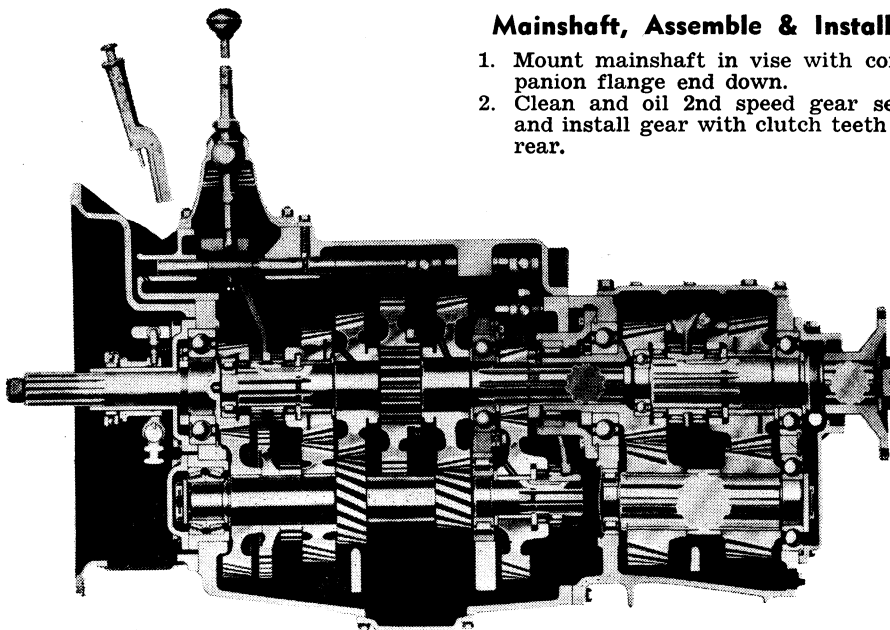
Fuller ten speed transmission, Model 10-B-1120
